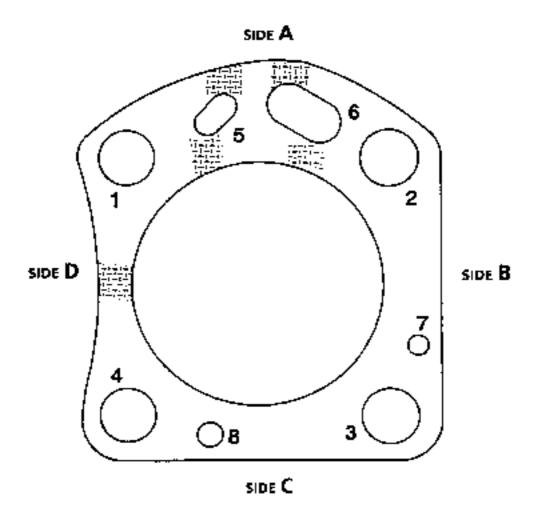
Plan view of Augmentor and By-Pass Valve Joint Washer
